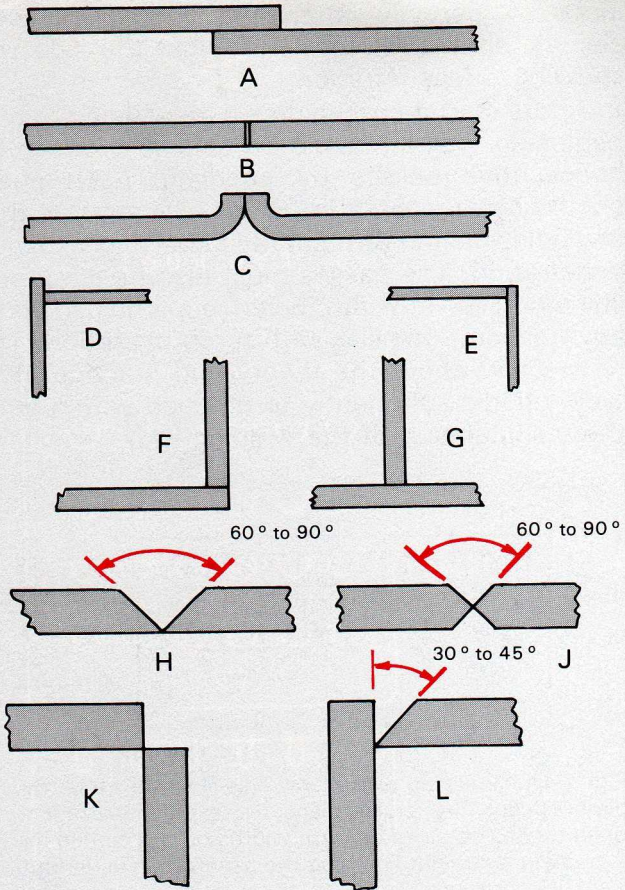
Some typical welding joint designs: A—Sheet steel lap joint in the flat position. B—Sheet steel butt joint in the flat position. C—Flange joint in the flat position. D and E—Outside corner joints. F and G—Inside corner joints (G is sometimes called a T-joint.) H, J, K, and L—Joint designs for metal plate. Note that when welding joints A, B, and E through L, welding rod is used as the filler metal. When welding the joints at C and D on sheet metal, no welding rod is required as a filler metal because the metal pieces themselves are melted to form the bead and to join the pieces together.
